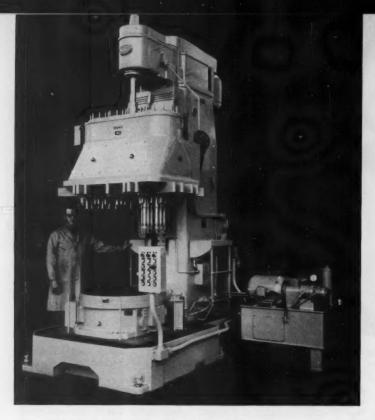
Natco vertical, heavy-duty drilling machine having multiple spindles and a hydraulically indexed table
